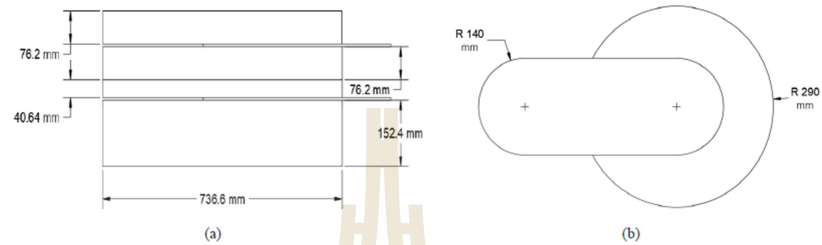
The dimension of modeling WPT (a) front view (b) top view
